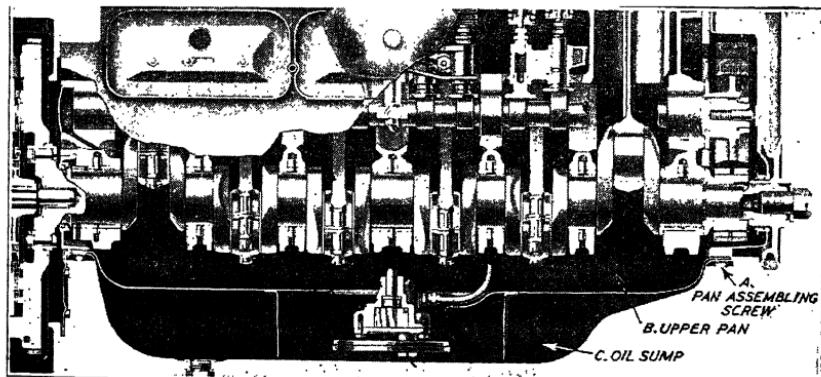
Pan and Oil Sump for Full Pressure Lubrication. A—Pan Assembling Screws;
